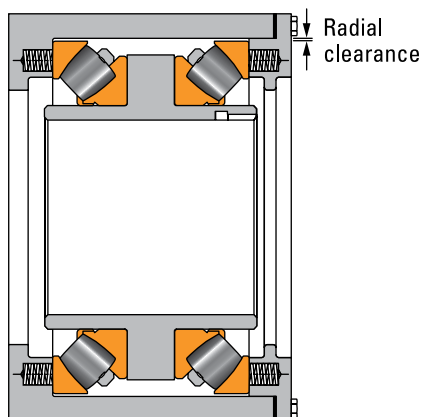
Face-to-face mounting arrangement of a TSR-EM bearing set.
